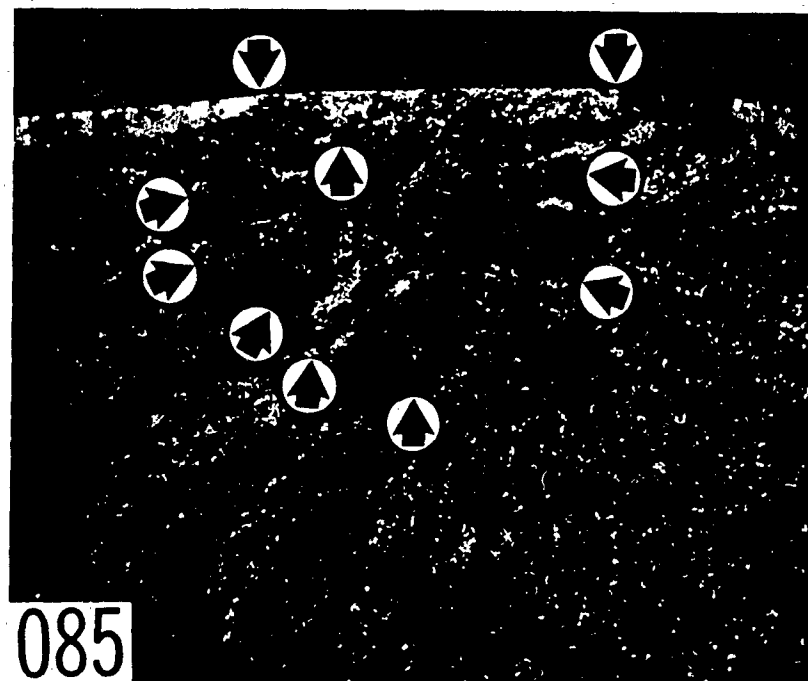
Higher magnification view of fracture initiation region. Two arrows at top show length of small surface crack present before the fracture. Other arrows indicate flat-topped hills or flat-bottomed holes. Approximately 14 X.
